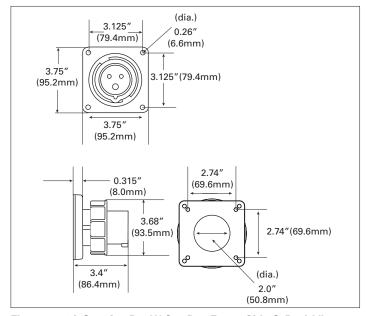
30A & 32A 2-P, 3-W & 3-P, 4, Front, Side & Back View Inlets
